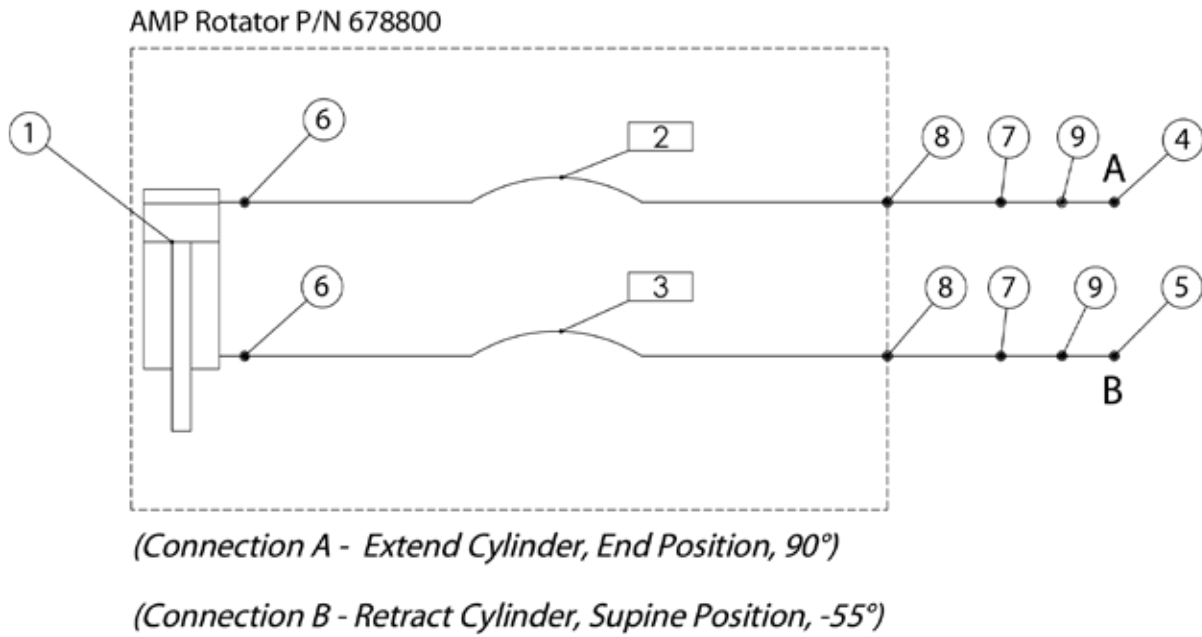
Drawing 678800-H Hydraulic Assembly Single Rotator
